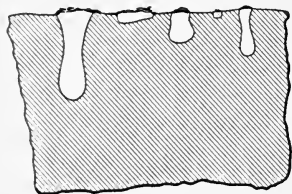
Gas pockets caused by iron oxide crust in surface of open-sand casting.
